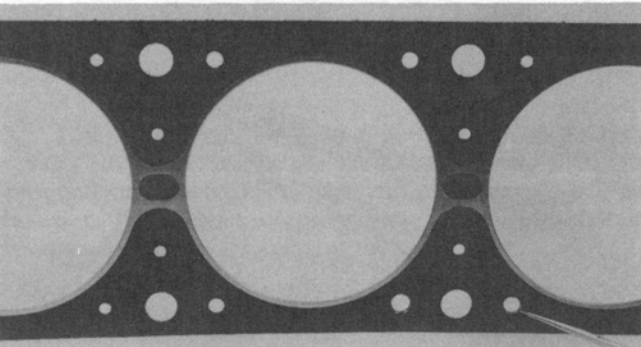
Enlarge outer coolant holes in production head gasket for endurance racing.
